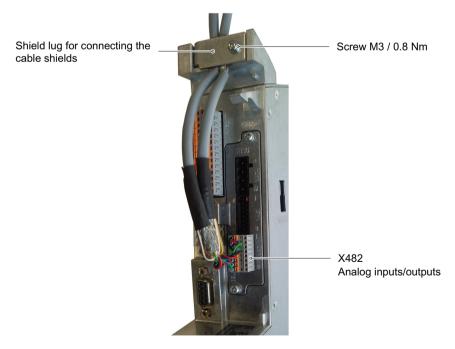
Shield support for TB30 on the CU320-2 DP
